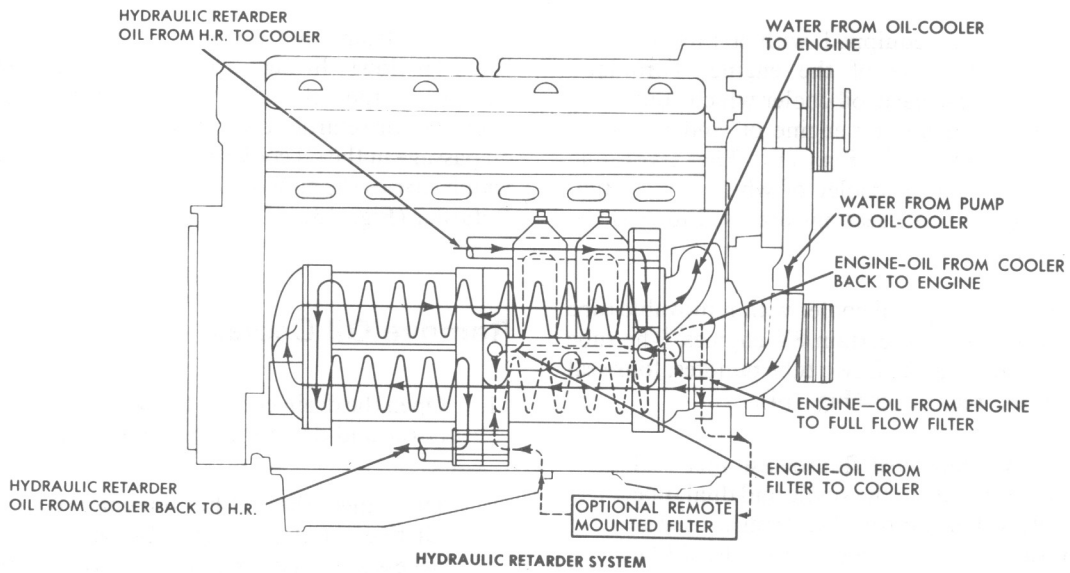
Dual Tube-Type Oil Cooler Mounting
